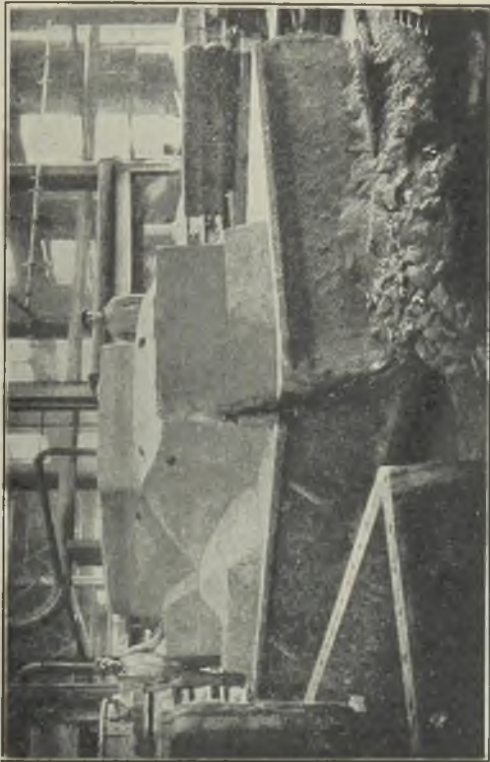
MOULD READY FOR CLAMPING BEFORE CASTING.
